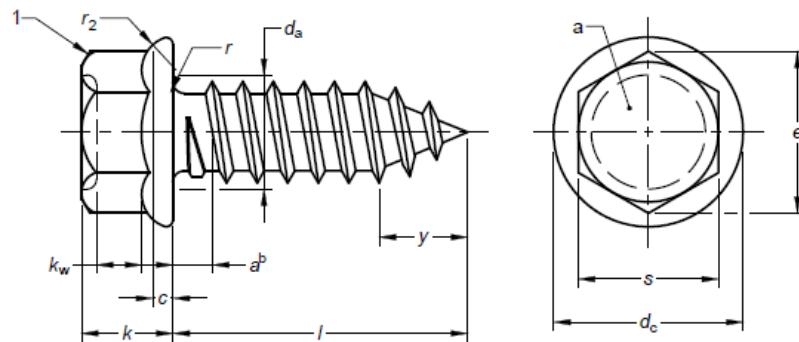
(C) HEXAGON FLANGE HEAD (TYPE C END)
